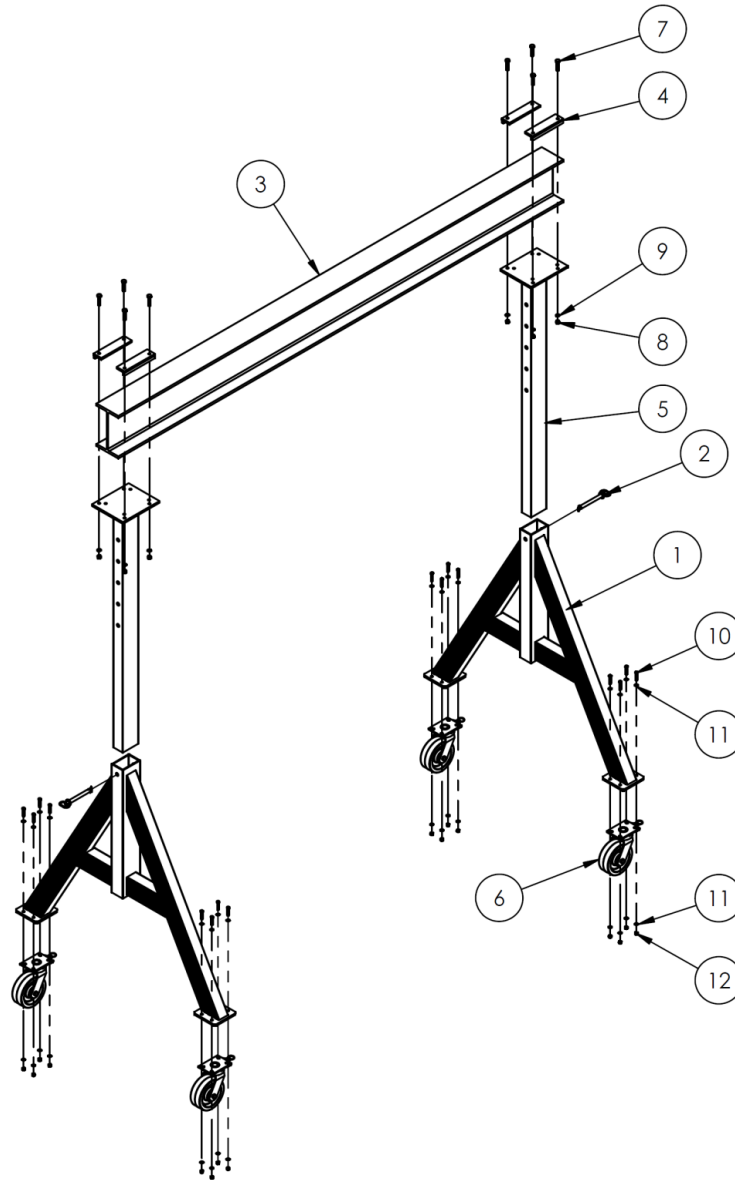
Exploded view of models AHA-6-8-8, AHA-6-8-10, & AHA-6-8-12
